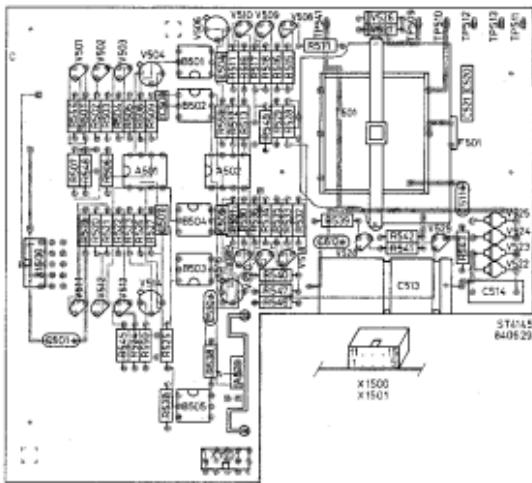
Galvanic separation p.c.b., lay-out, component side
